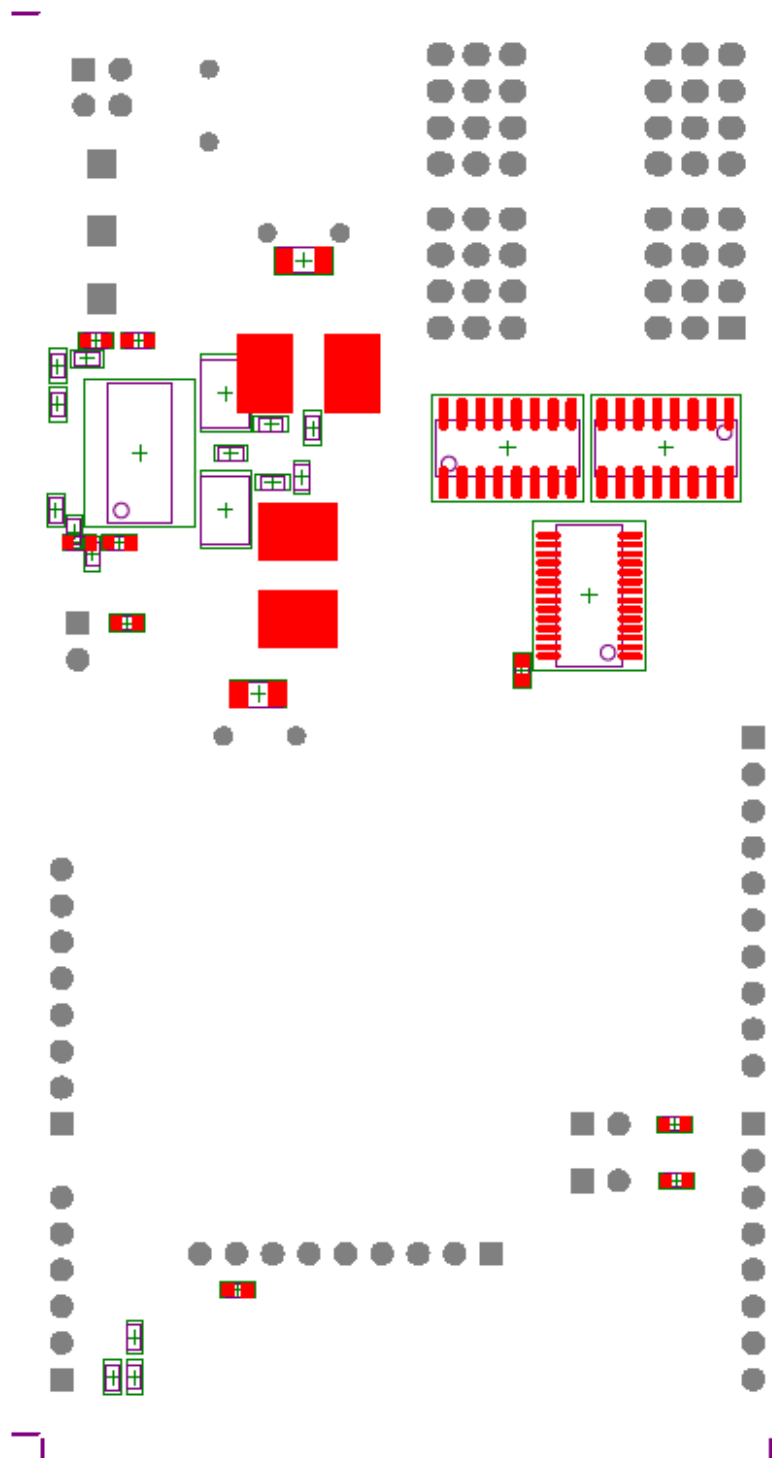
Prototype Rover Shield PCB - Top Pad Master
